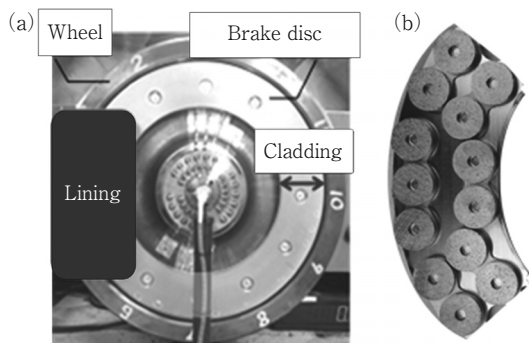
Test material before brake test (a) Disk (b) Lining [出典：文献 3)]
